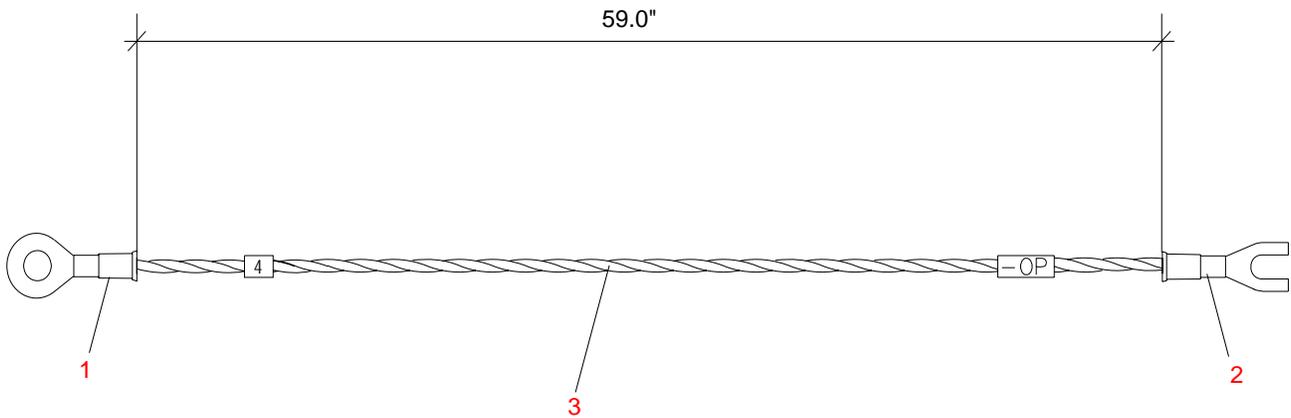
Negative Wire - Driver Board 4 Cable Assembly
